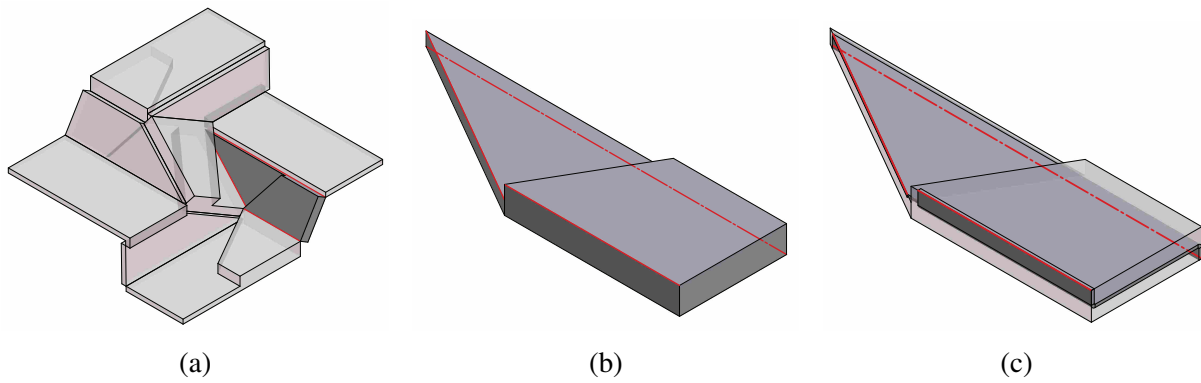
Application of sheet metal to an edge panel of a square-twist mechanism. (a) A thick panel in context of the mechanism; (b) thick panel; (c) bent panel. Red lines signify hinge axes.
